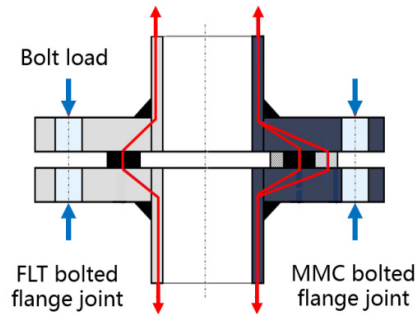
Difference sealing performance between FLT and MMC type bolted flange joints.
